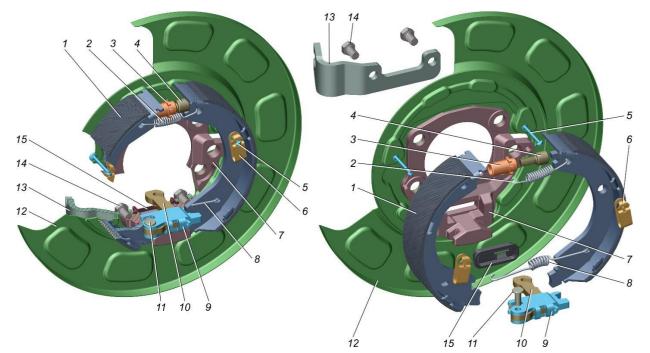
Parking brake (right/left): 1 - block with friction facing; 2,8 - coupling springs; 3 - adjustment link sleeve; 4 - adjusting screw; 5 - rod; 6 - clamping spring; 7 - base (right/left); 9 - expansion link body; 10 - drive arm; 11 - expansion link pin; 12 - support backplate assembly, (right/left); 13 - cable bracket (right/left), 14 - bolt; 15 - protective boot
